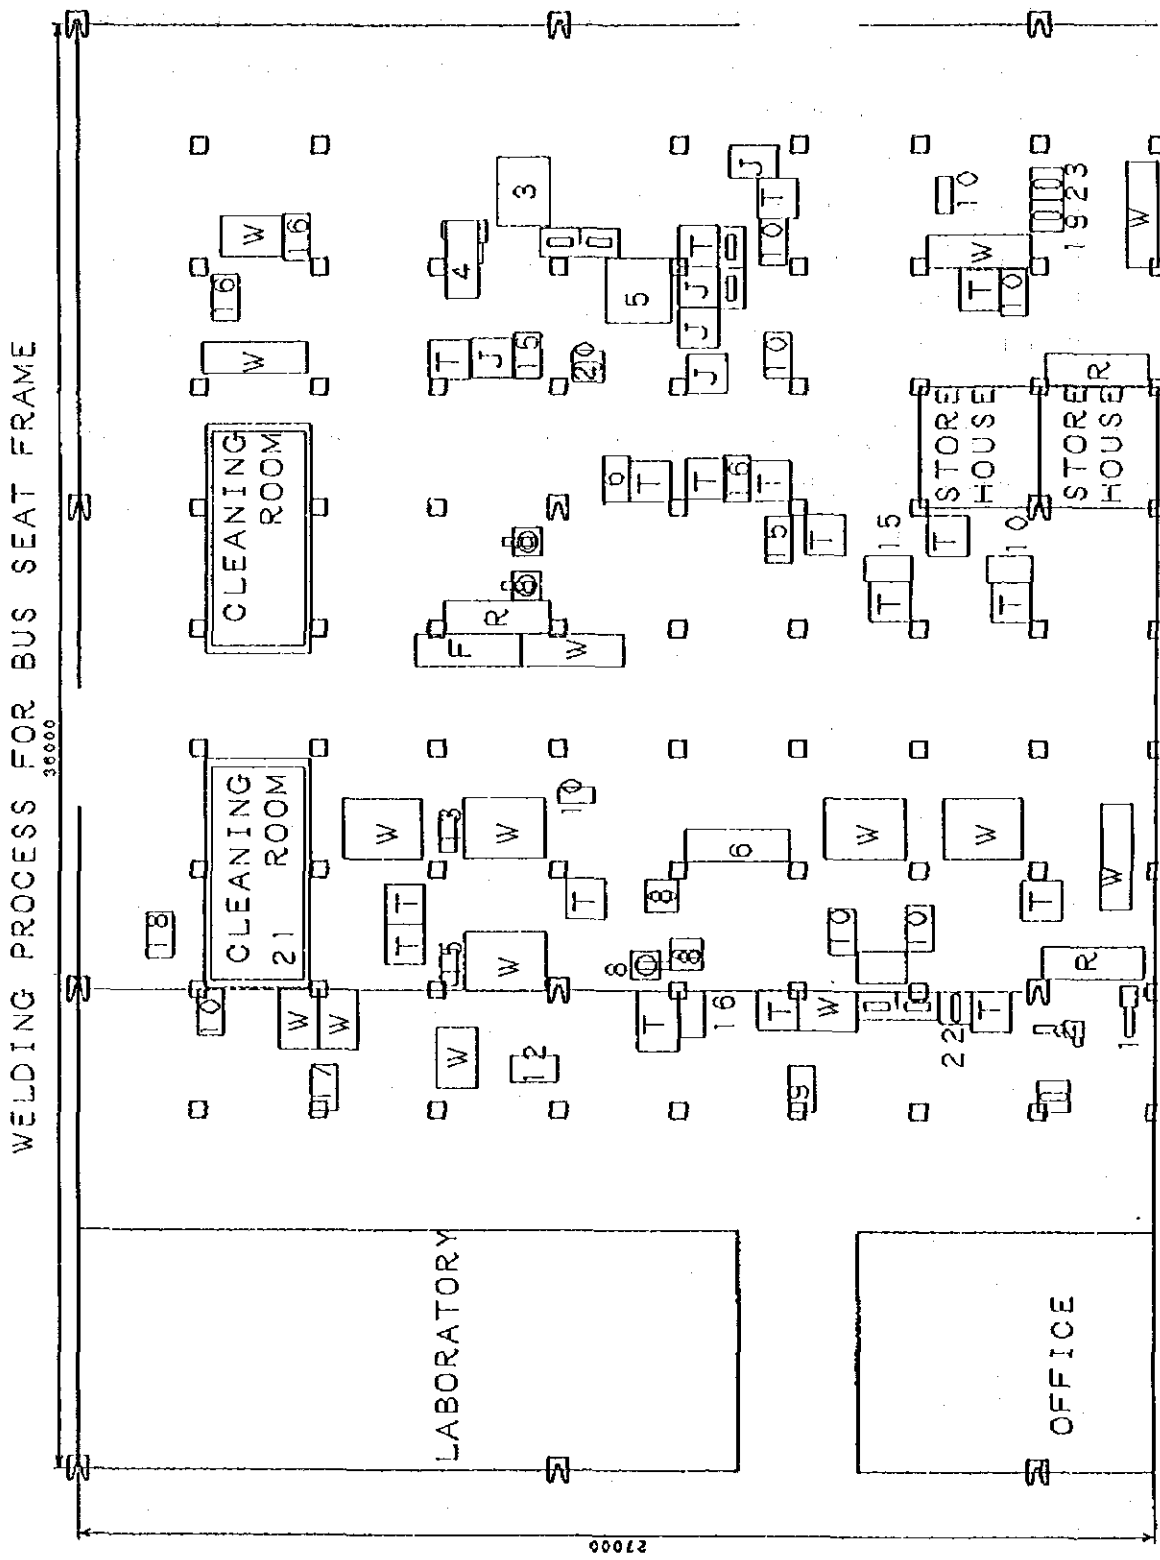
Layout Drawing of the Welding Process of Seat Frames for Buses and Railway Vehicles
